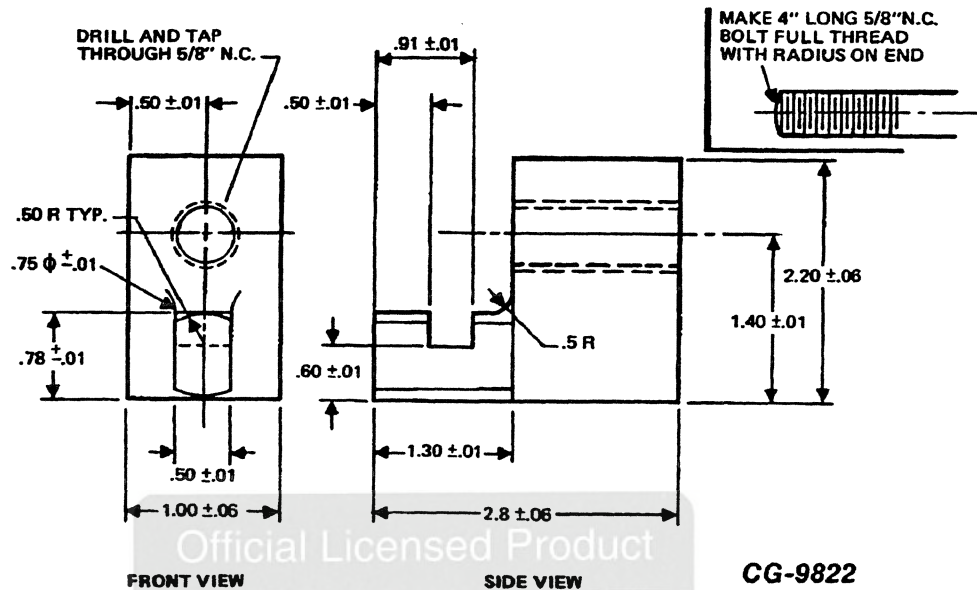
Crankshaft Front Oil Seal Remover (Made Locally)
